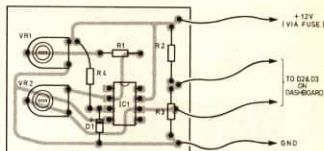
Component layout for Battery Condition Indicator. A fuse (FS1) should be inserted into the +ve supply wire using a flying lead type fuse holder
